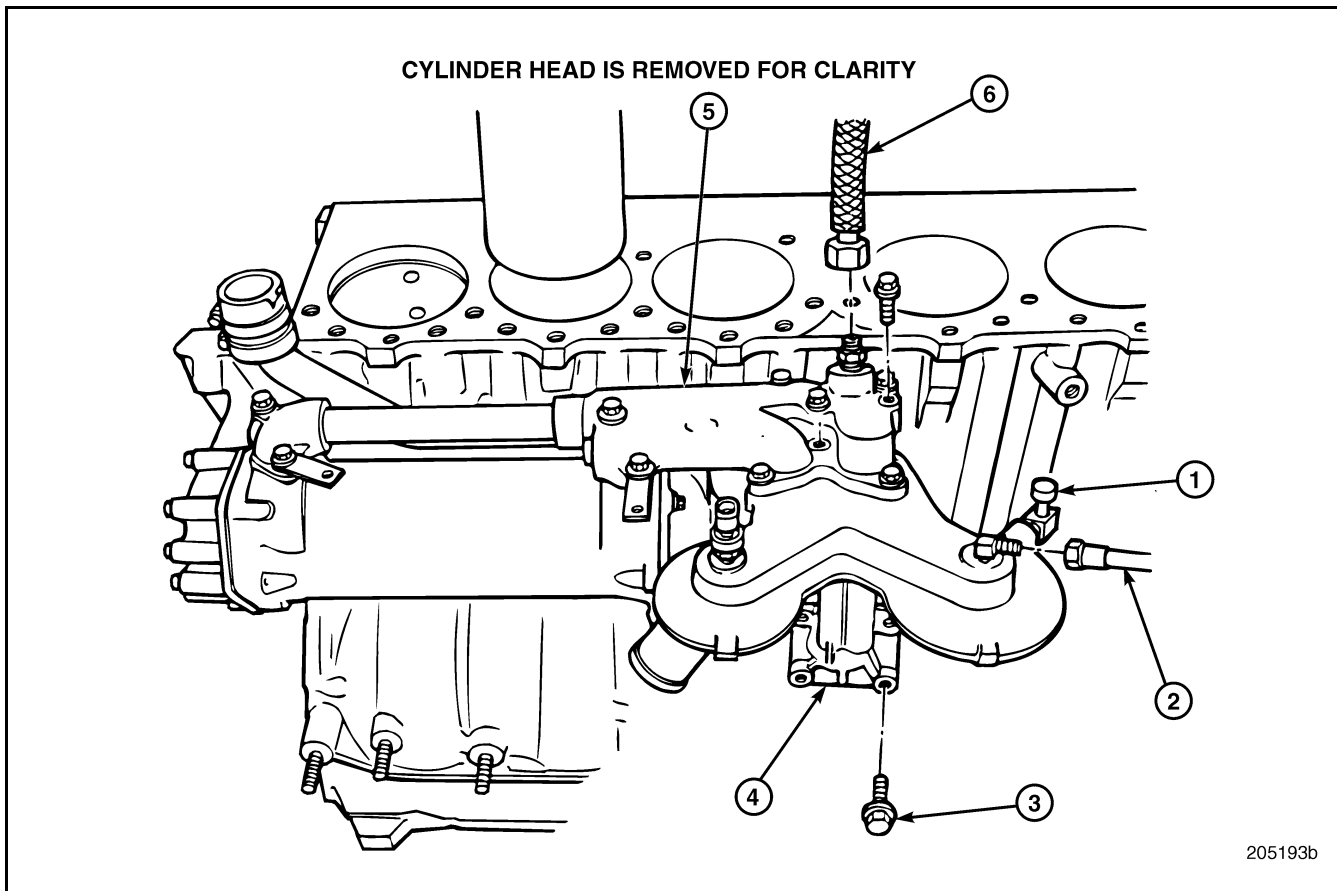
Removable Bundle Oil Cooler and Oil Filter Mounting Bracket Removal
